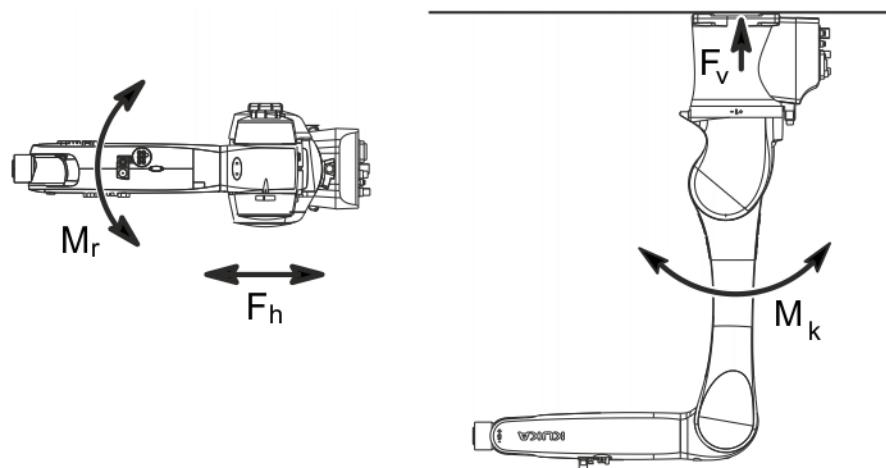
Loads acting on the foundation, ceiling mounting
